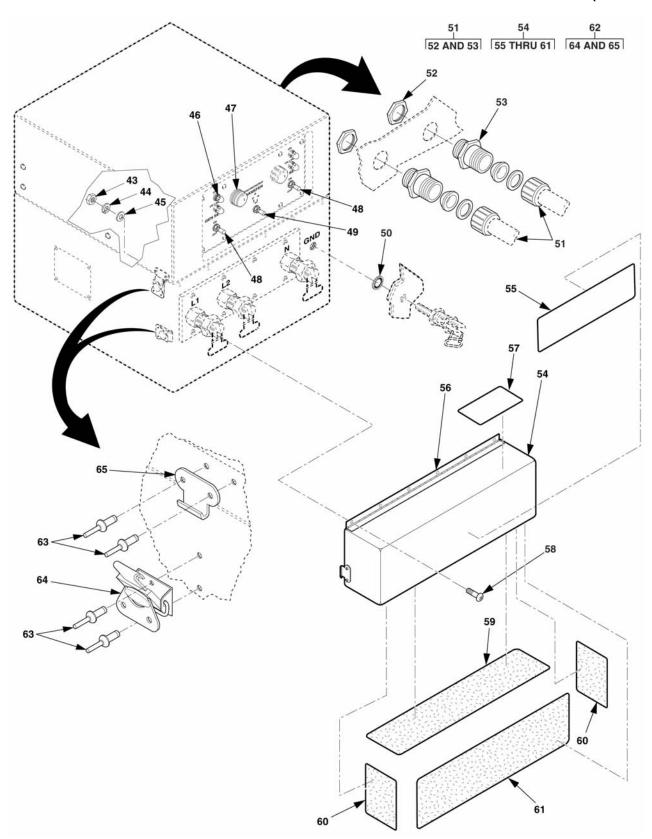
Switch/Box Assembly, 97403 13230E6950 (Sheet 3 of 3)
